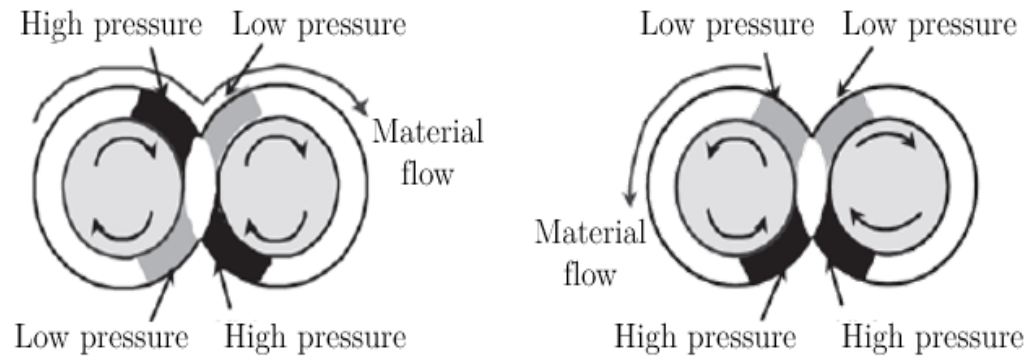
Screw rotations a) Co-rotating and b) Counter-rotating ^[25]
